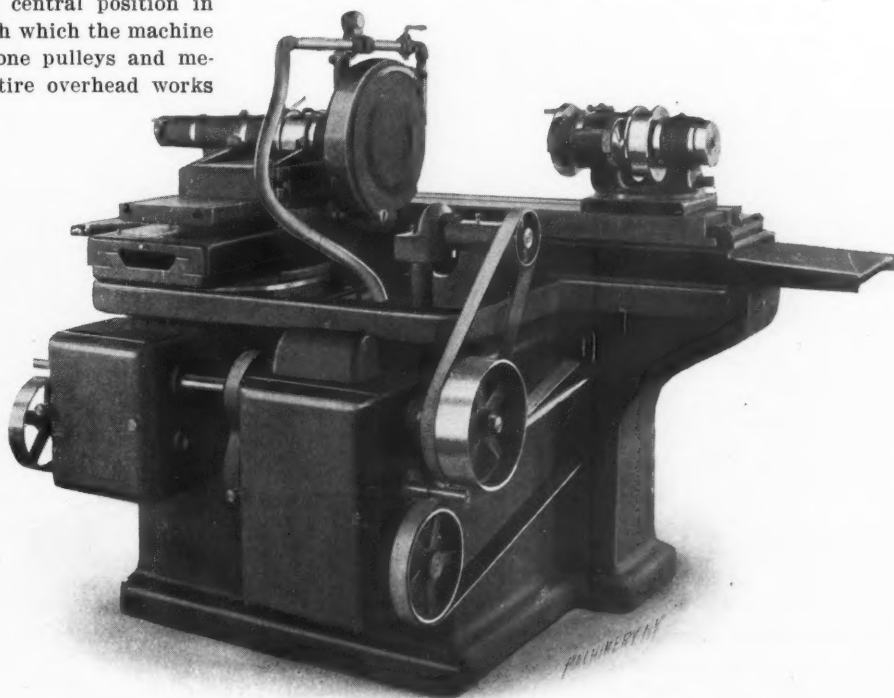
Rear View of Grinder showing the Feed and Speed Boxes
